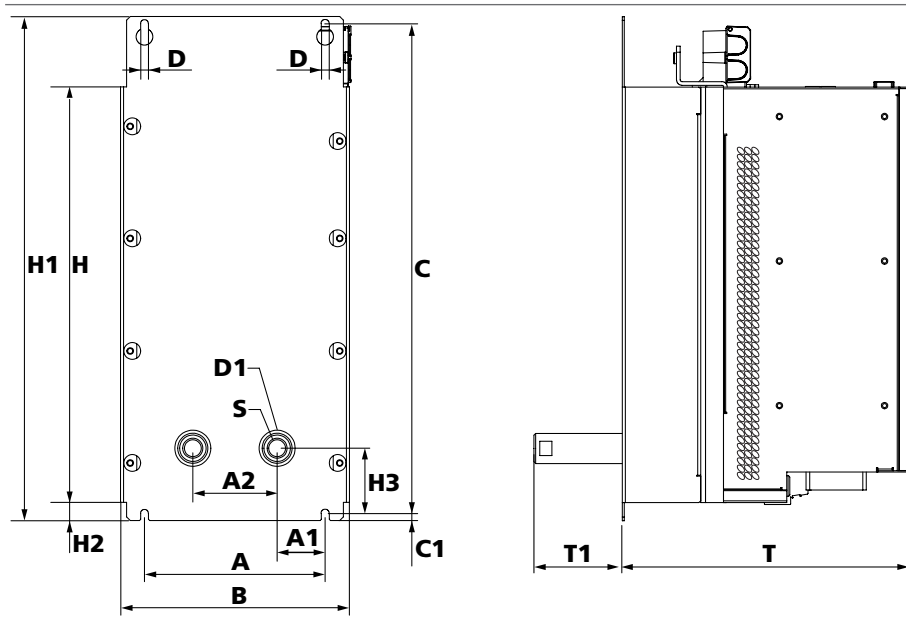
Dimensional drawing, liquid-cooled housing
